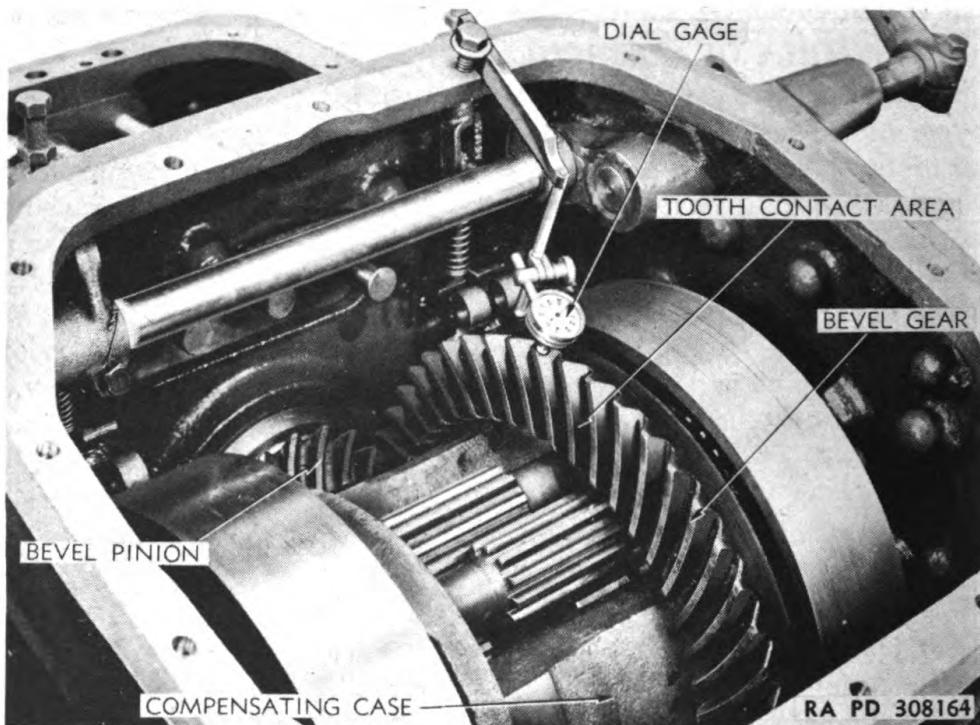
Bevel Pinion and Gear Adjustment, Using Dial Indicator (41-I-100)
